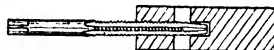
How to drill the clamping screw hole to allow the tap to enter and cut a full thread
